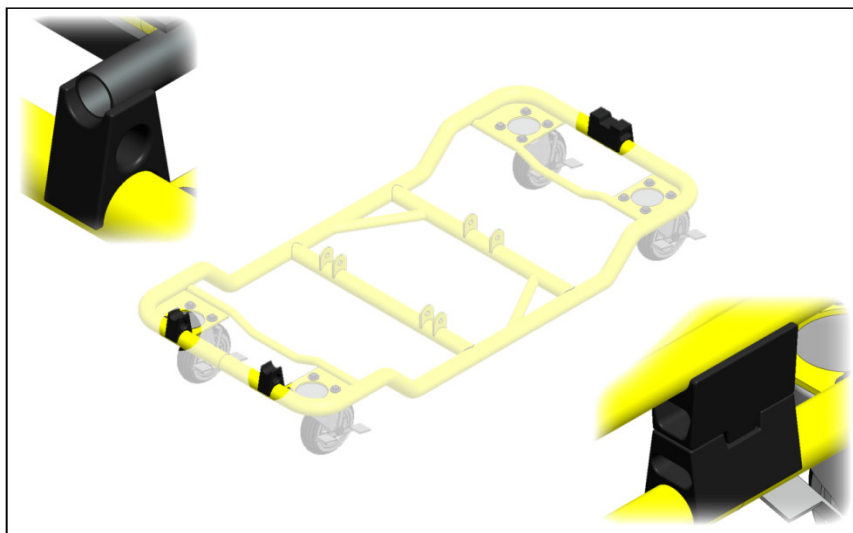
Lower Frame Assembly Showing the Location of the Bumpers.
